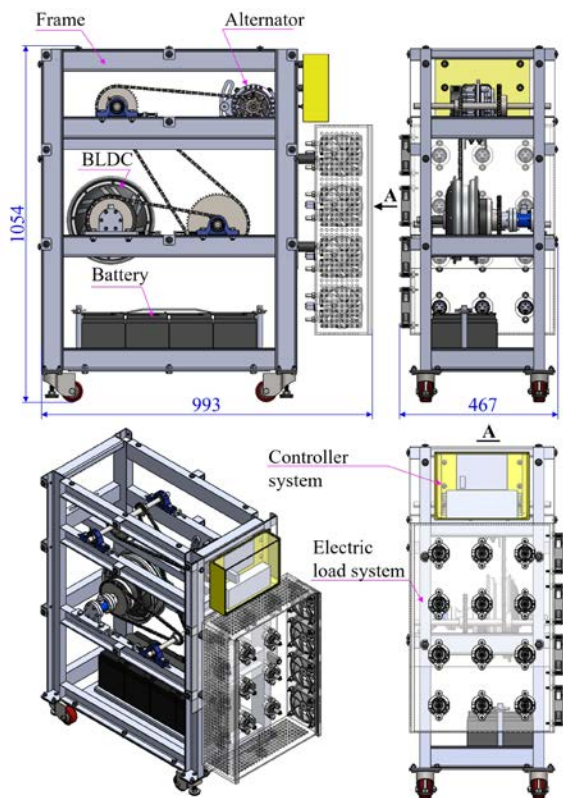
The 3D general layout drawing of the dynamometer with a 3-stage drive.
